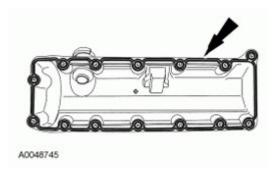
Identifying Adhesive Applying Area Around Gasket Courtesy of FORD MOTOR CO.
